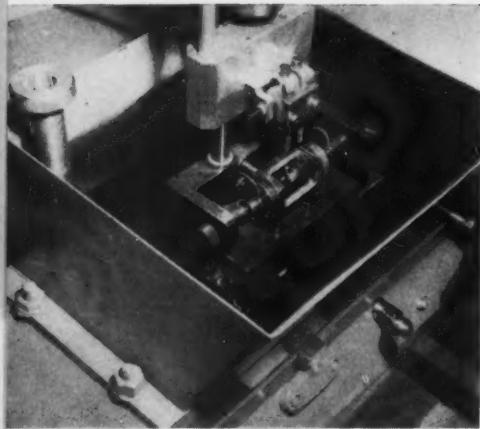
The parts are rough-formed into the sleeve workpiece by electro-discharge machining in about two minutes per port.
